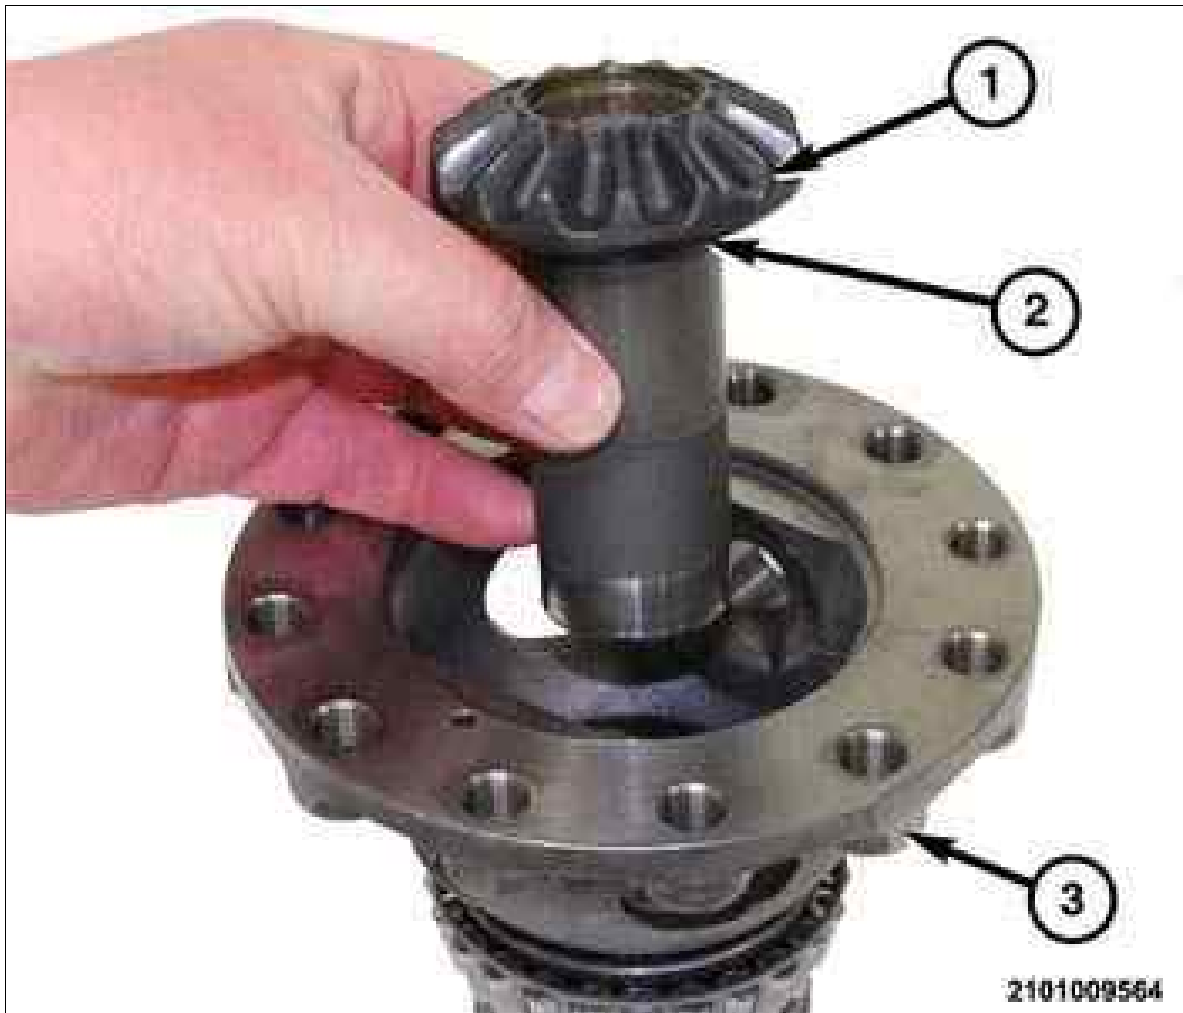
Removing/Installing Pinion Shaft & Conical Thrust Washer
